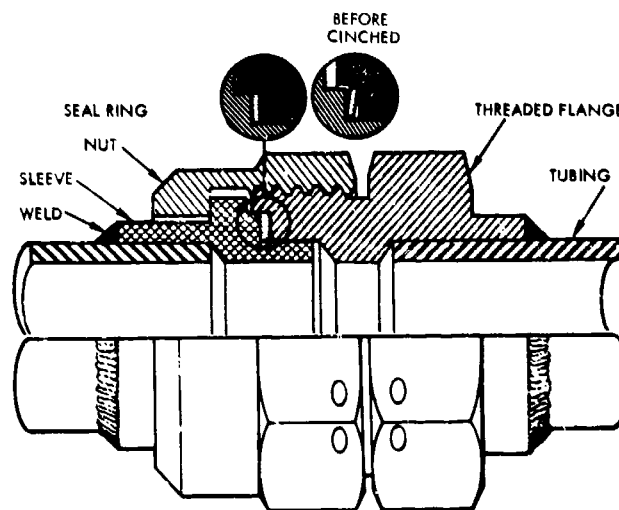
Roylyn Connector, Showing Tube-to-Tube Connection
